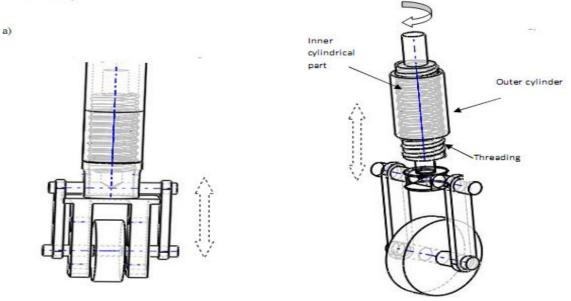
a) Embedded version of the screw mechanism used. b) Screw mechanism functioning.
